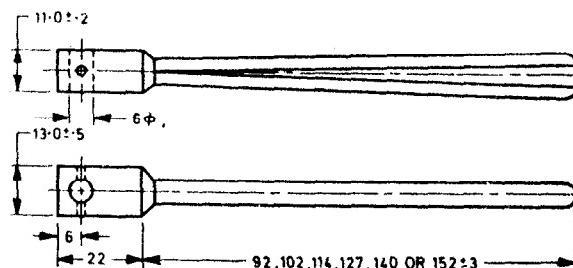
A TYPICAL TWEEZER PLAIN TONGUE
